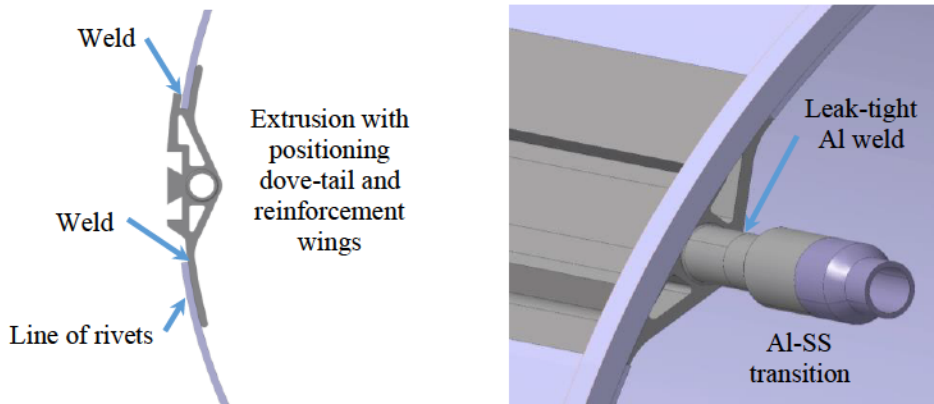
Details of the thermal shield cooling line extrusion and end fitting.
